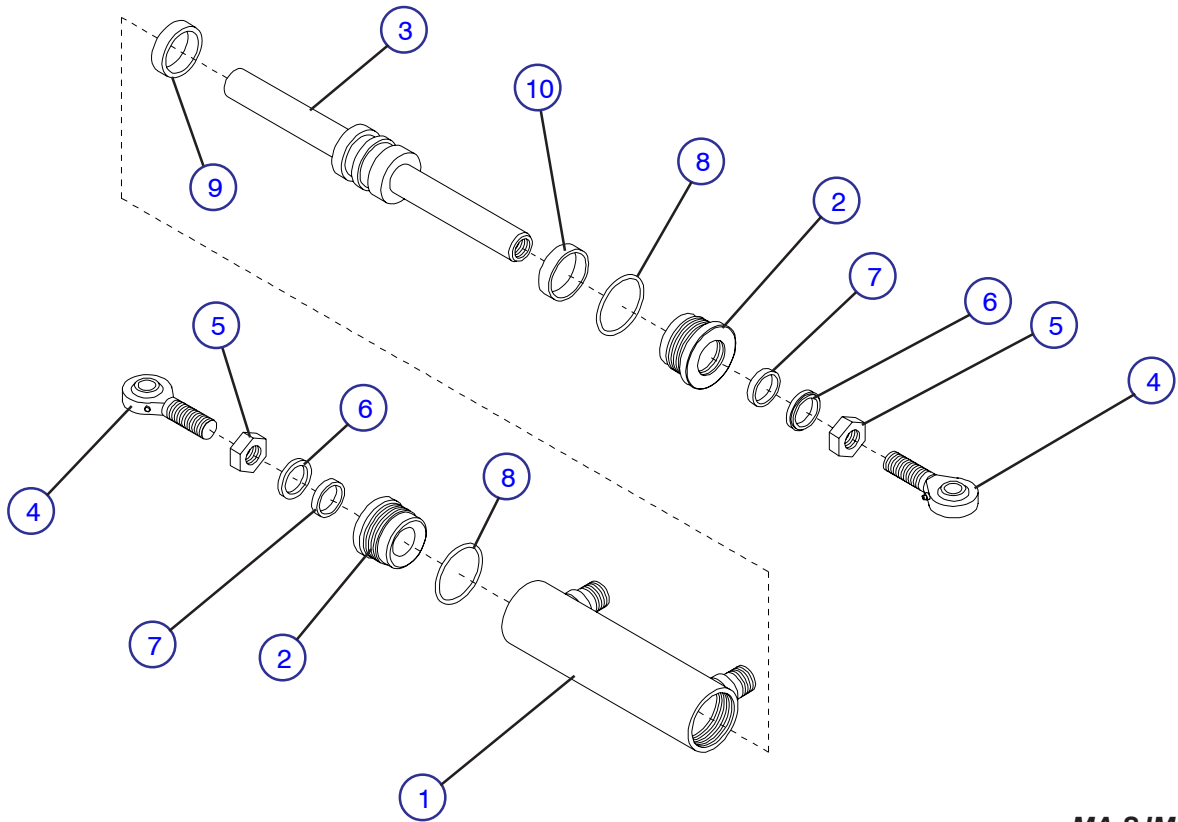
B. BRAKE CYLINDER ASSEMBLY
